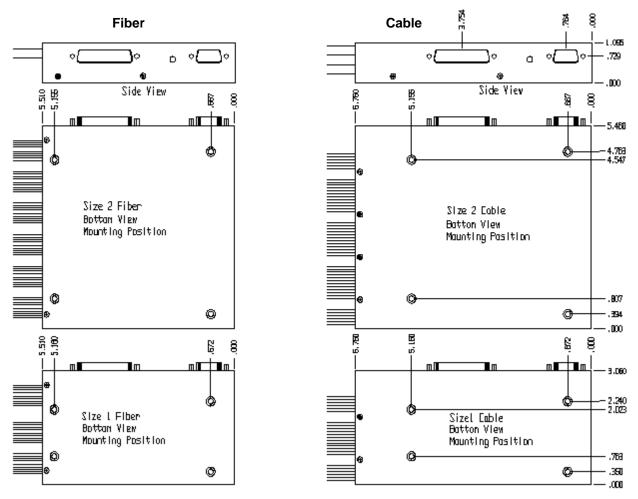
Mounting Hole Locations for Fiber and Cable Versions
